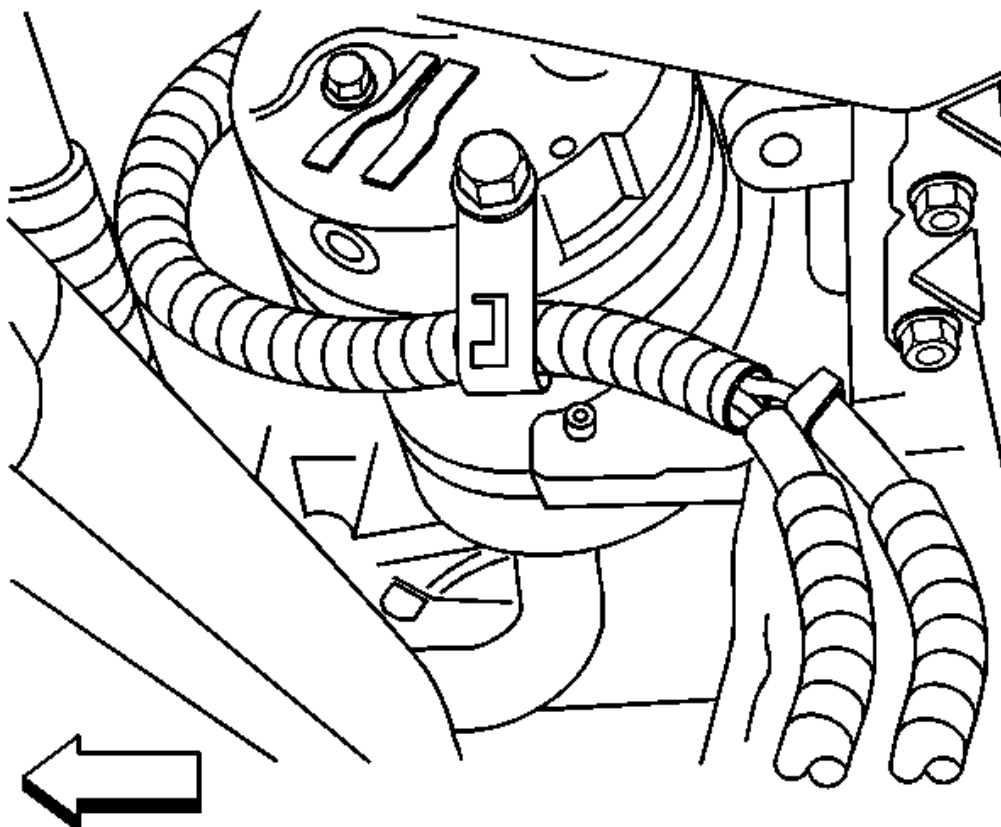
View of Wiring Harness From Rear of A/C Compressor
